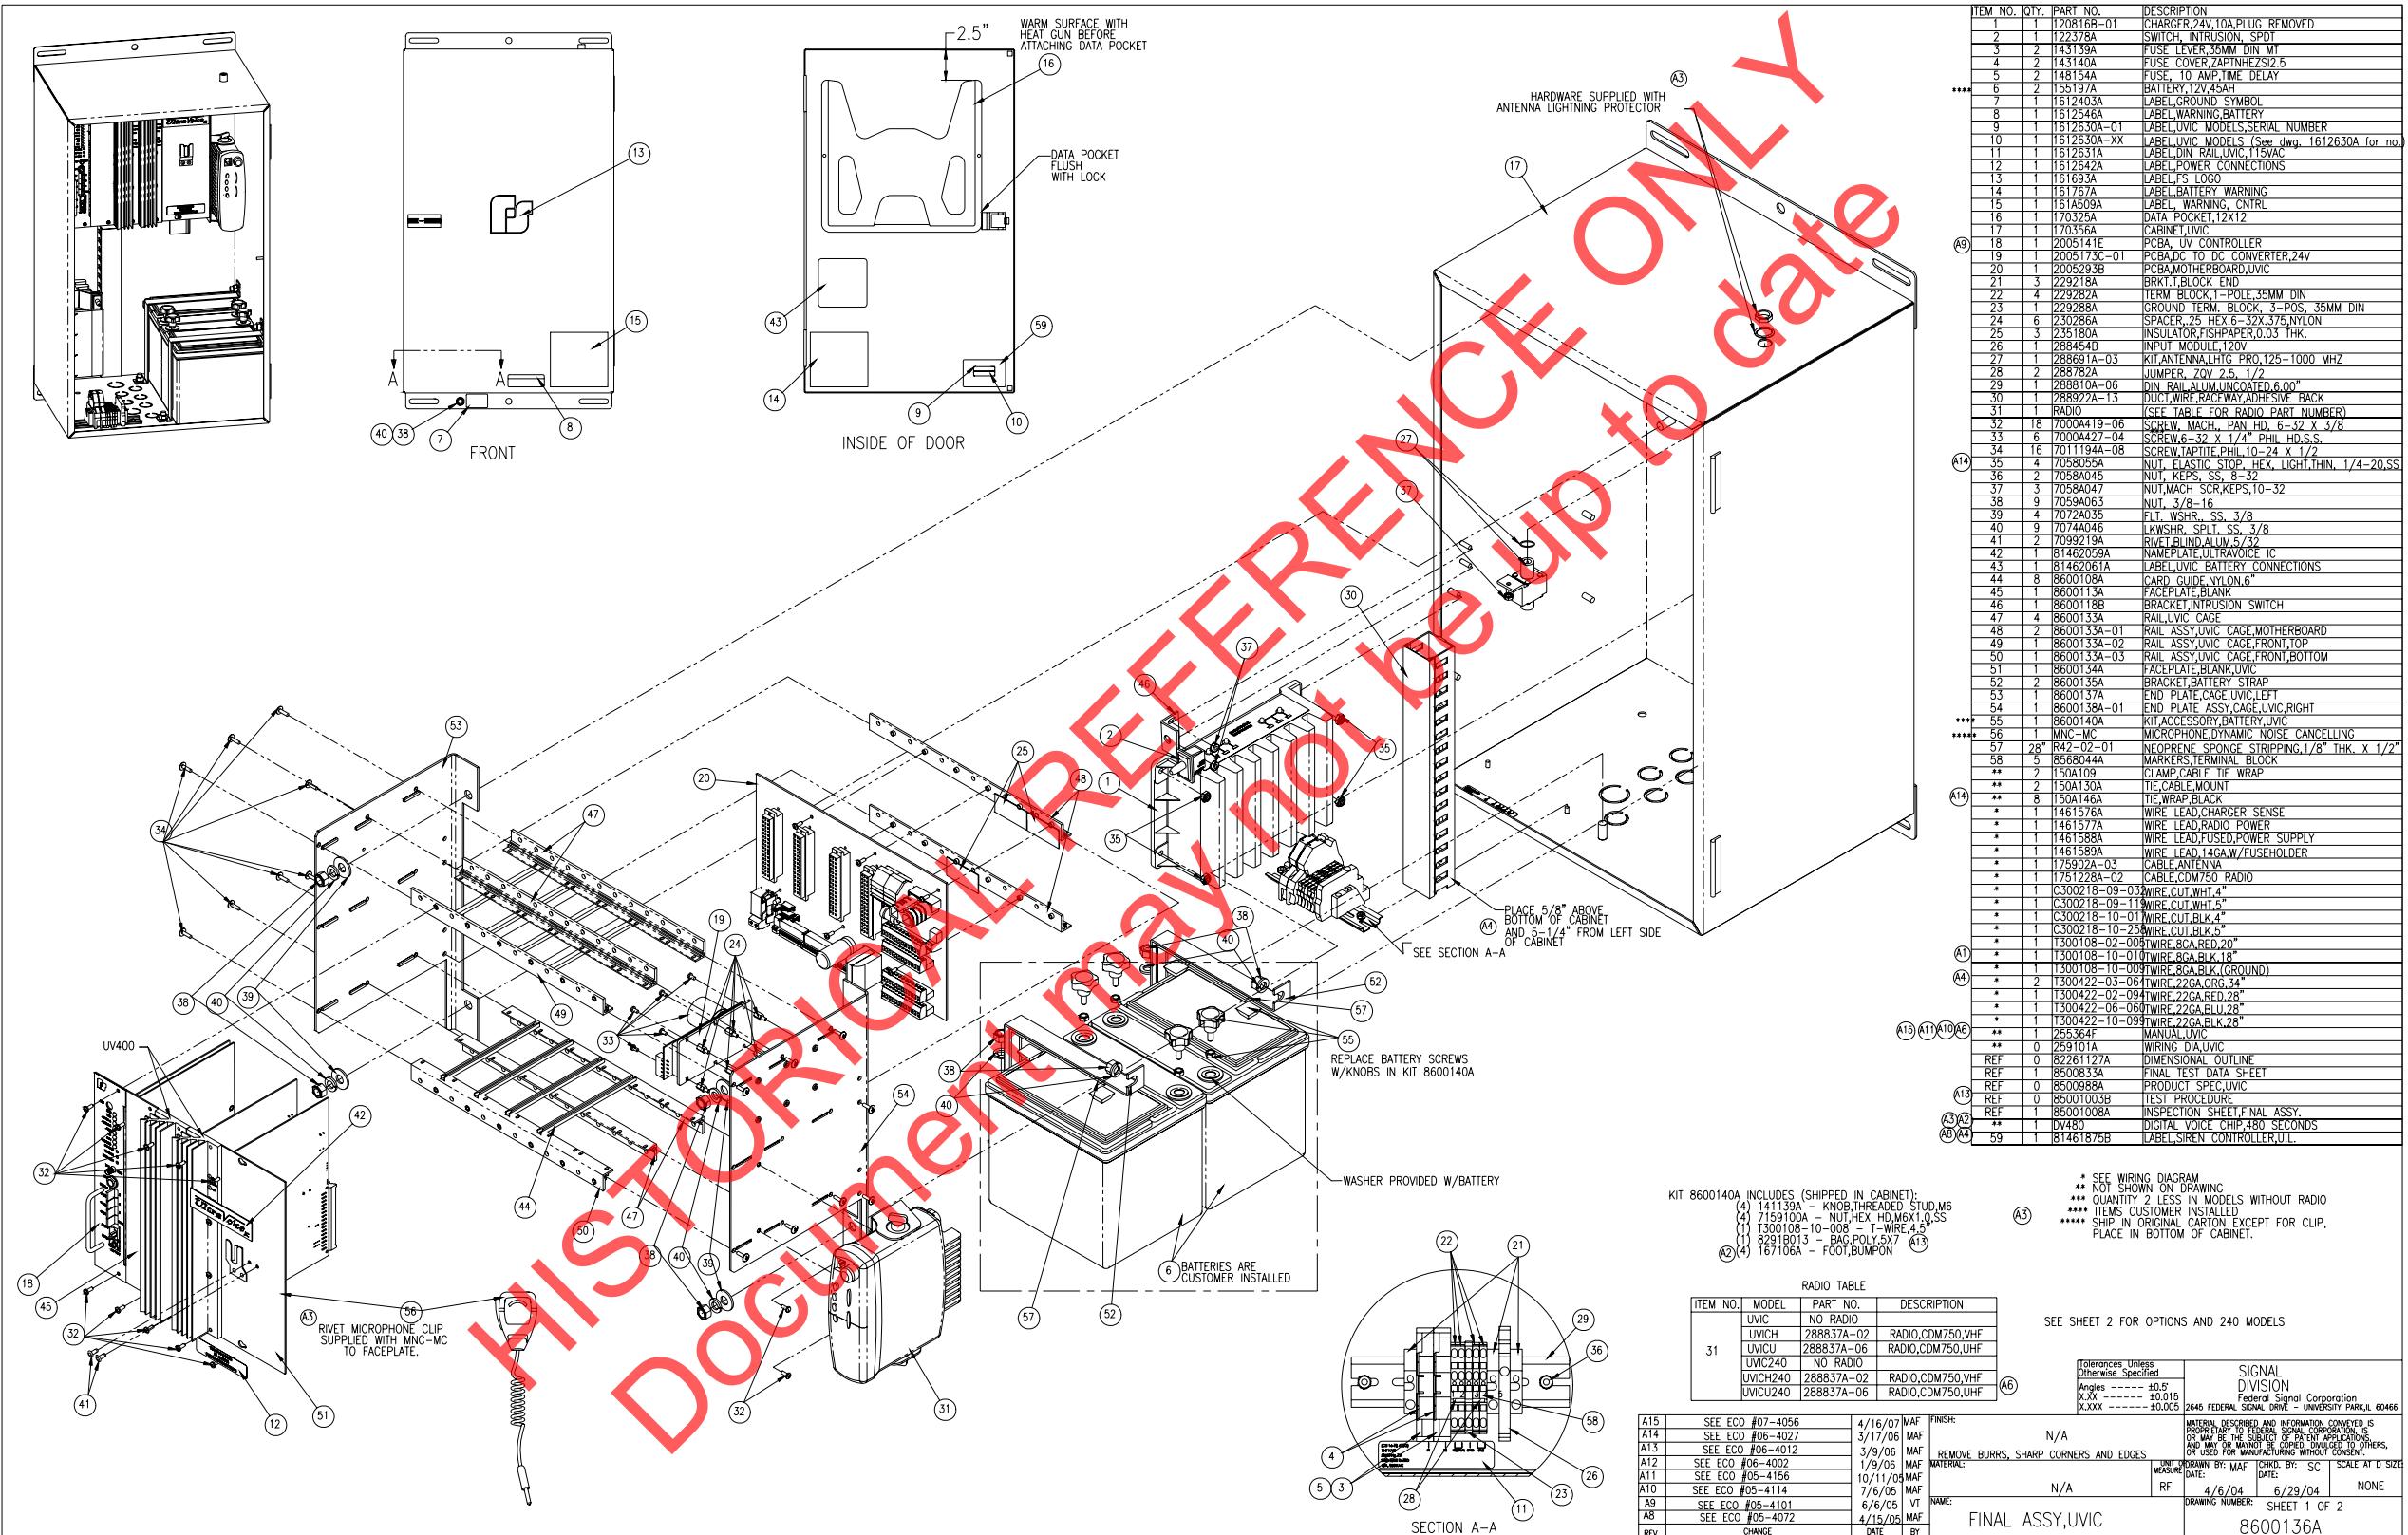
UVIC Final Assembly and Parts List (Page 1 of 2)
